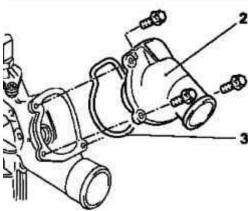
Removing the thermostat housing: 1 - coolant hose, 2 - body thermostat, 3 - gasket
